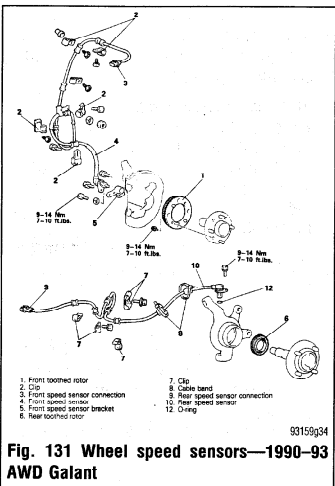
Wheel speed sensors—1990–93 AWD Galant
